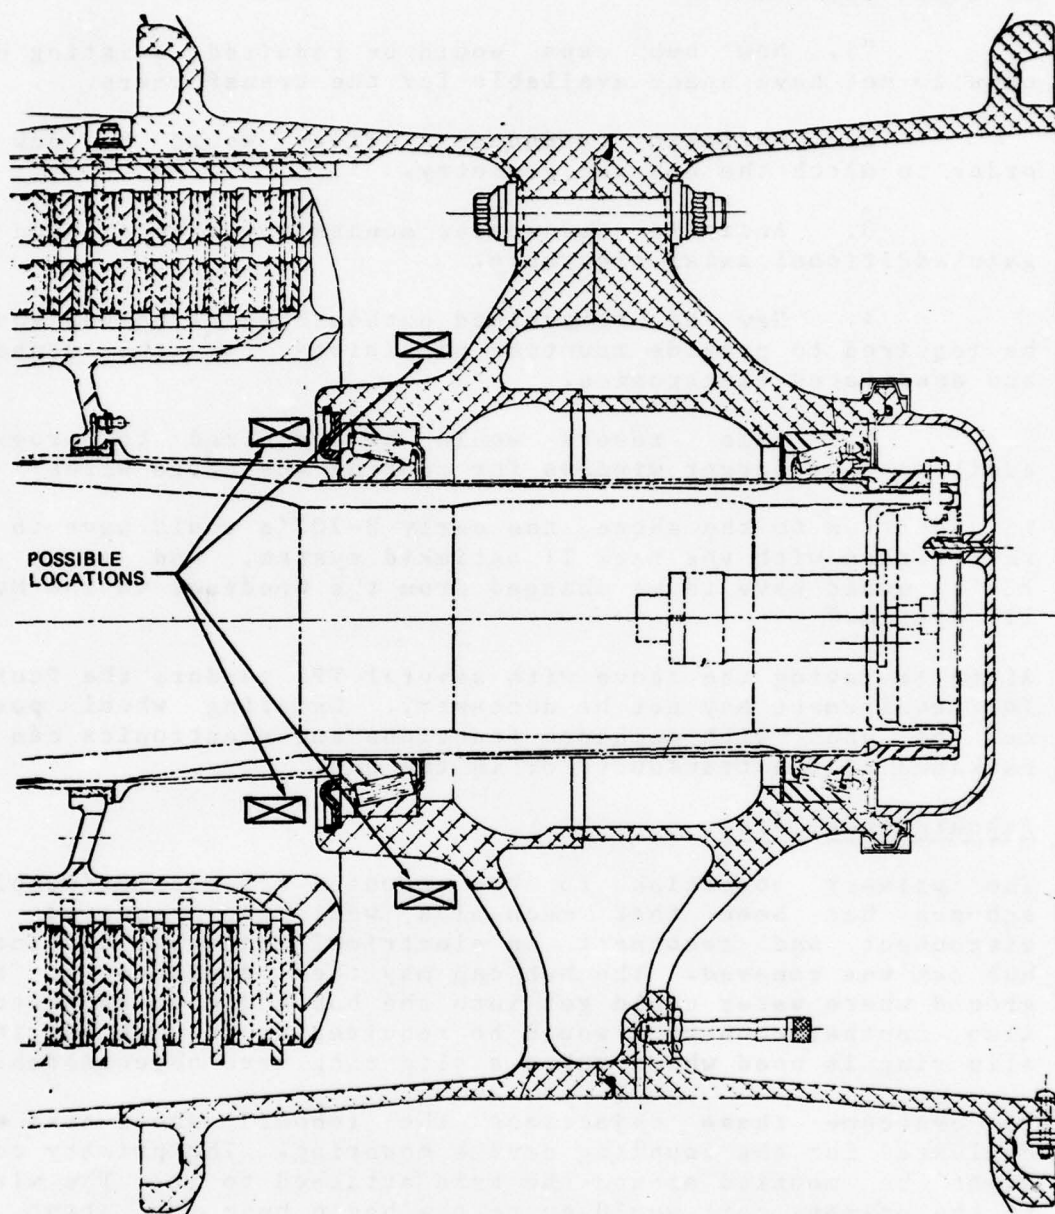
ALTERNATE INBOARD WHEEL INSTALLATION LOCATION
